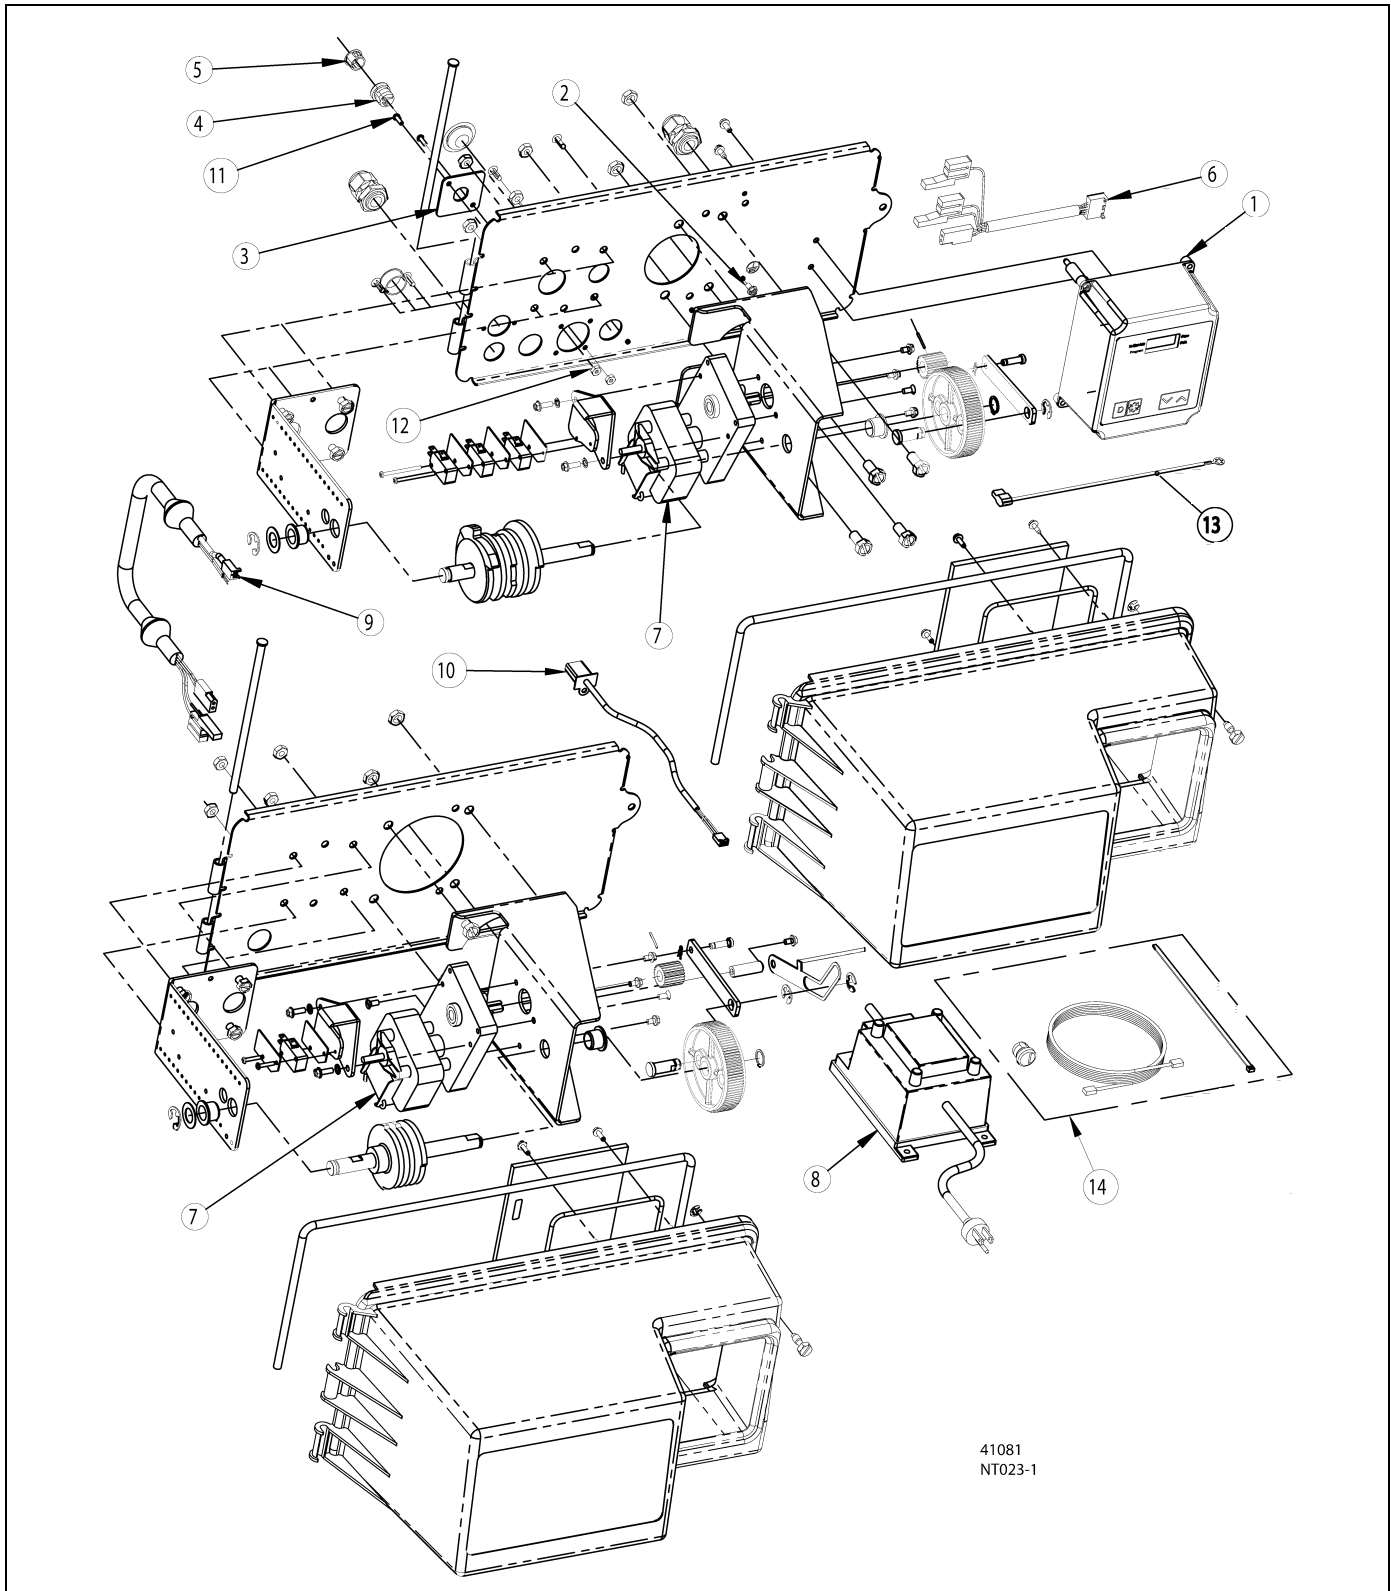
3150/3900 Upper Drive and Lower Drive Power Head Assembly
